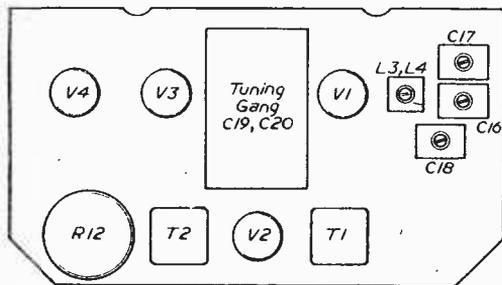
Top view of the printed board, showing the position of the trimmers and major components.
